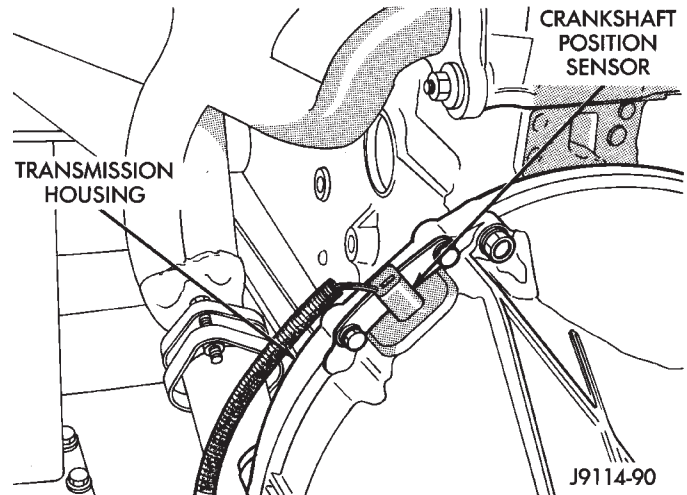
Crankshaft Position Sensor—4.0L Engine With Man. Trans.
